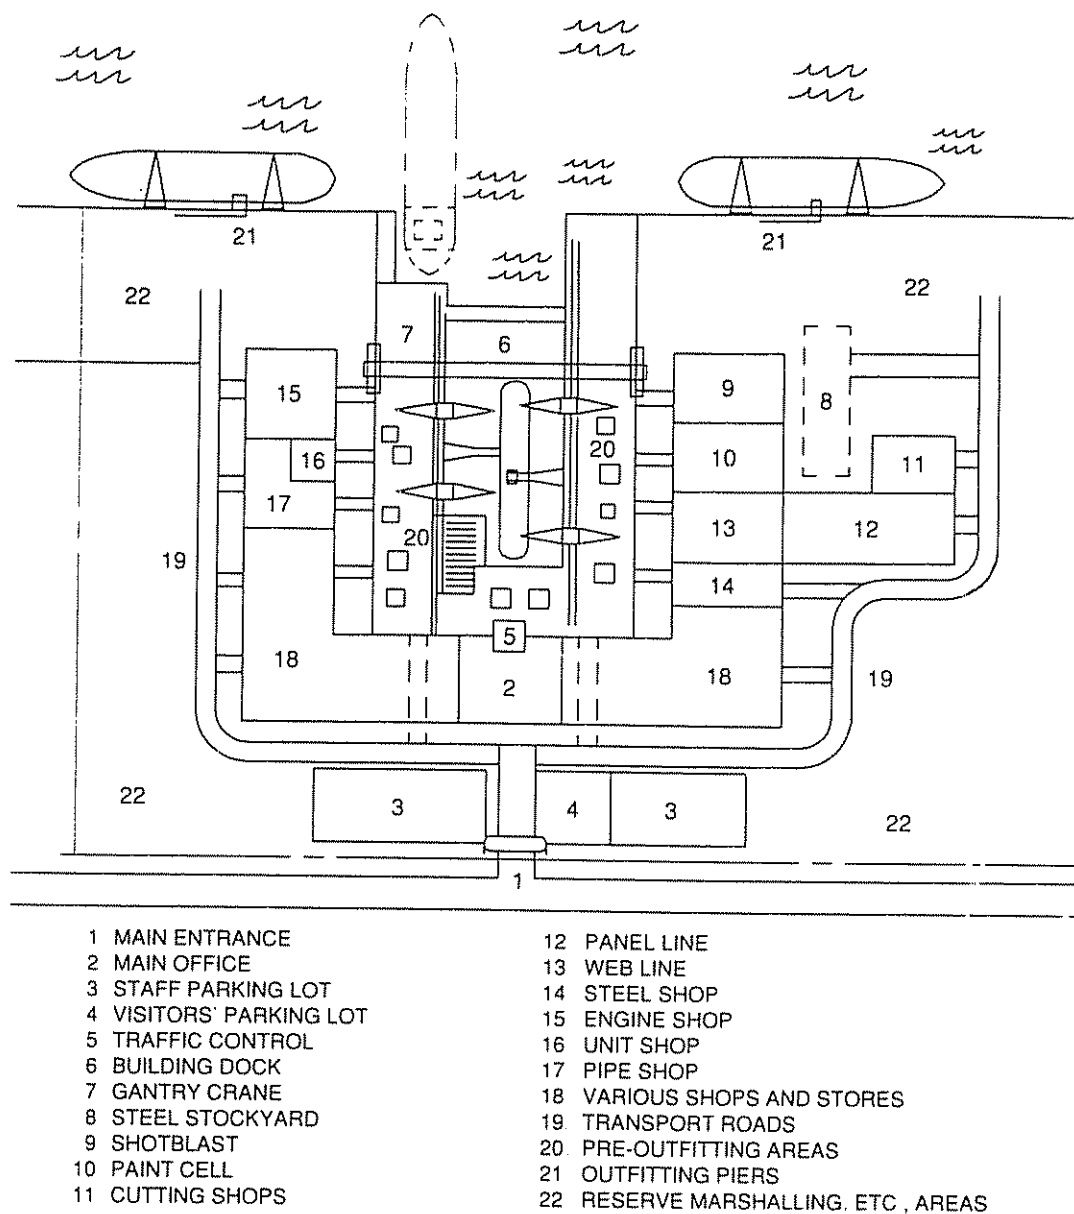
Proposed fourth-generation newbuilding yard layout
